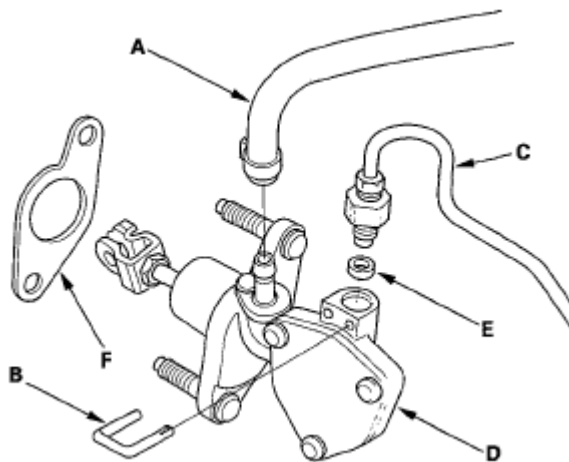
Identifying Reservoir Hose, Retaining Clip And Clutch Line
